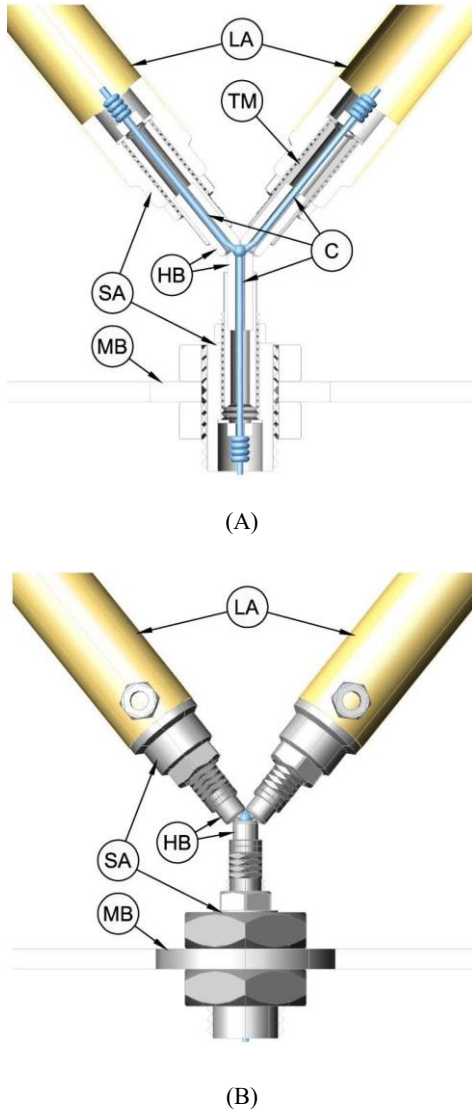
Connector joint assemblies, shown in (A) section and (B) side view. (SA) sub-assemblies, (LA) linear actuators, (MB) mobile base, (C) elastic cord, (TM) threaded mechanism, and (HB) hollow barrel.
